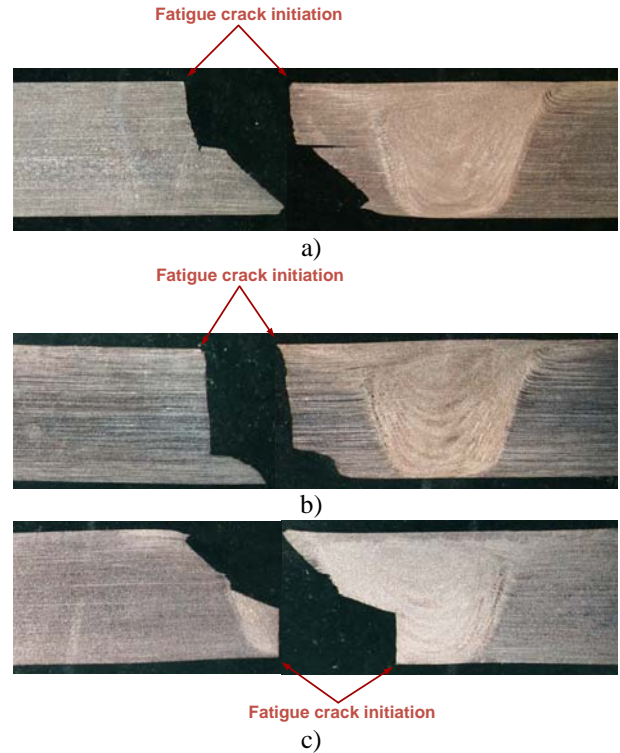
Fracture surface details – specimens a) IT23, b) IT26, and c) IT24.
